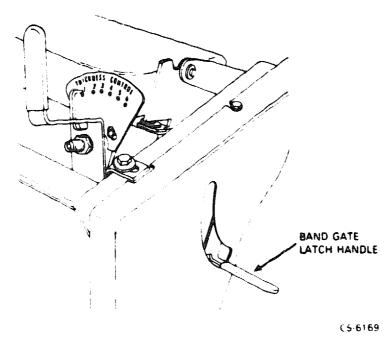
Band Gate Door Assembly (Front Right Hand Side of Printer with Cover Raised)
